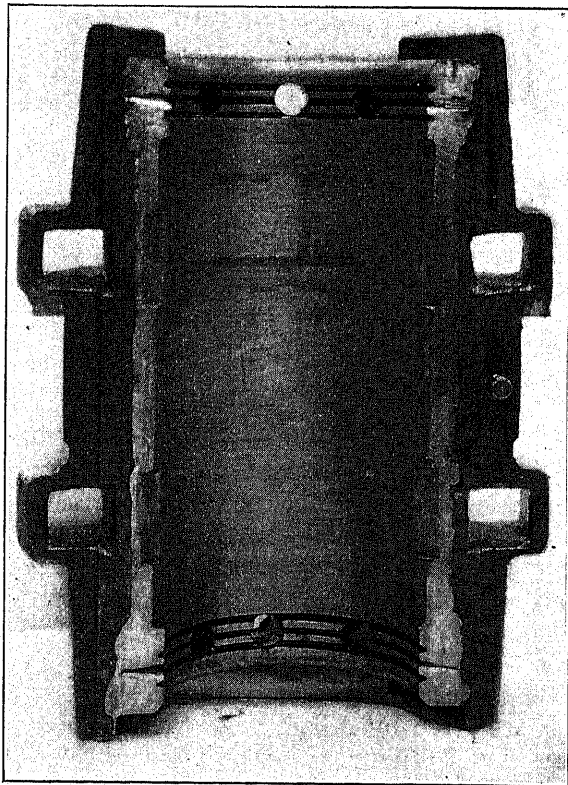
PHOTOGRAPH OF DAMAGED BEARING OF 500-H. P. INDUCTION MOTOR
